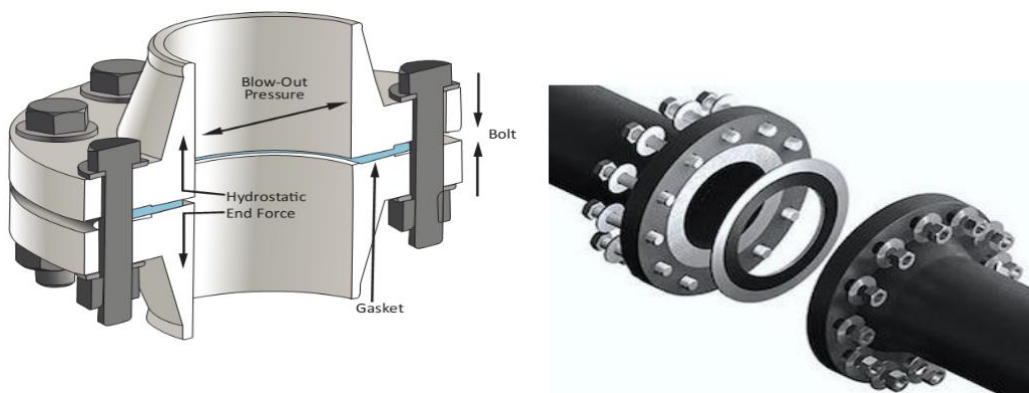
Flange connection and flange connection section (Metallic-steel, 2018)
